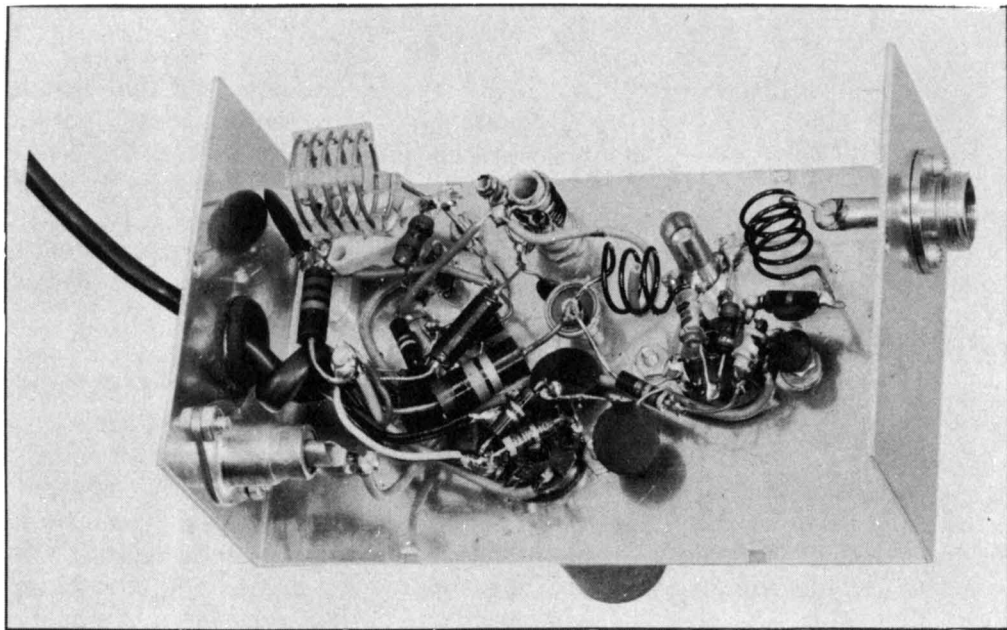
Under chassis view of 144 mc converter. The 12AT7 socket is at the upper left, in front of L4-C4. L3 is upper center, with C6 in front of it. At the right are the r-f coils, L1 and L2, with C1 behind the 6BQ7 socket. Output receptacle J2 is mounted on rear lip of chassis at left, next to power cable. R2, R3, and RFC-1 are supported by phenolic tie point at left.
